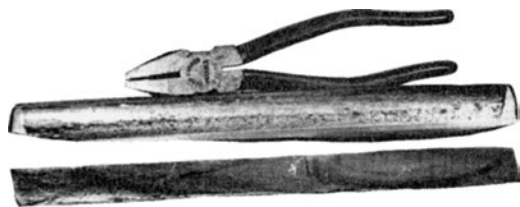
A broken out helical gear tooth. Note serious pitting and wear of tooth ank. (The actual size of the tooth can be judged from the standard pliers laid next to the tooth.)
